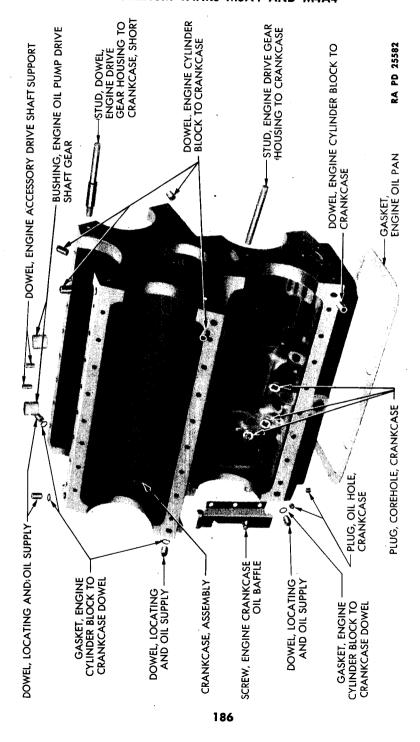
Crankcase, Right Side And Radiator End, Exploded
